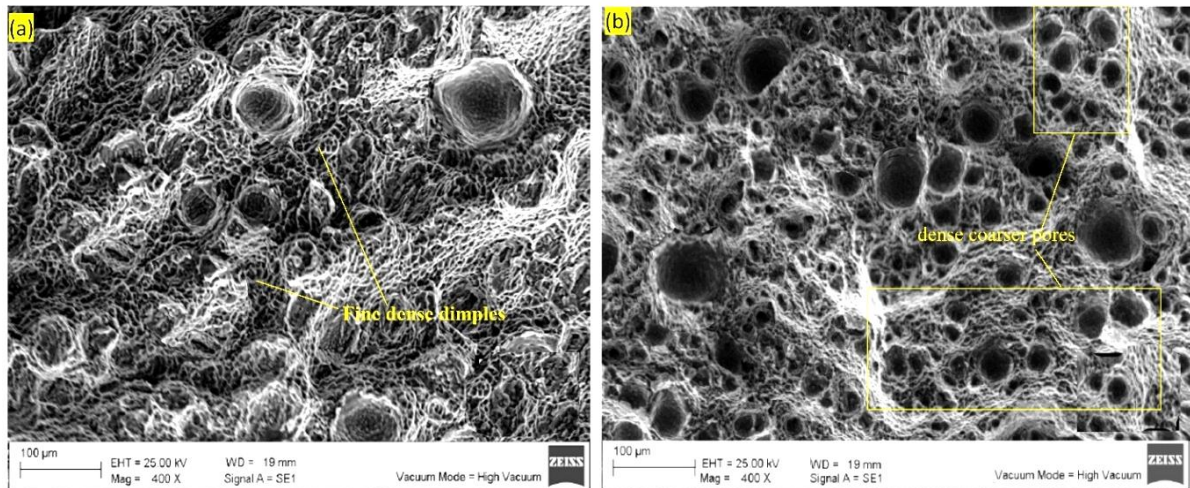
SEM pictures of the FSW specimens' fracture surfaces (a) AA6061, (b) AA7075
